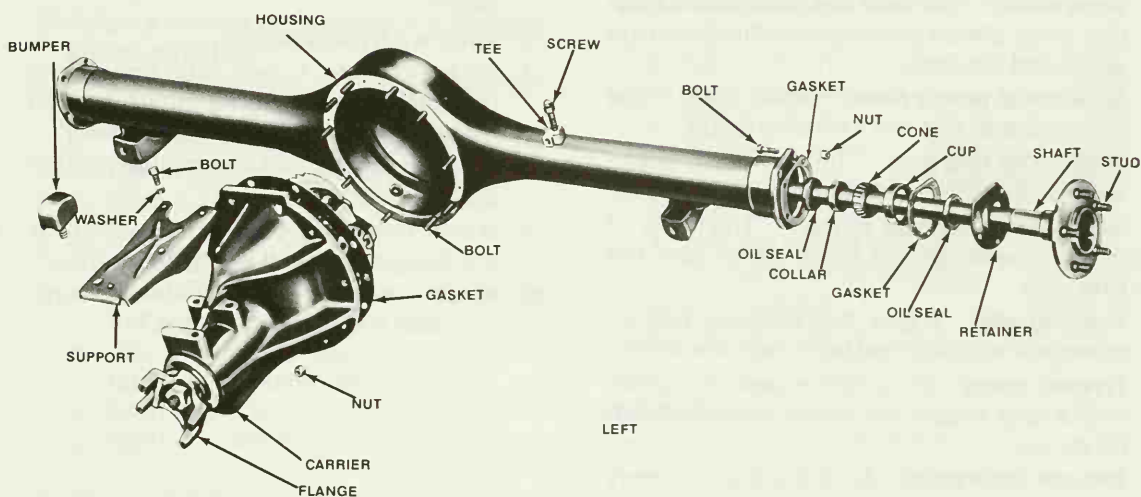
A removable carrier can be separated from the axle housing. (Chrysler Corporation)
